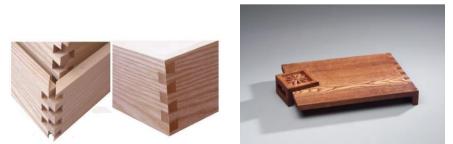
The structure of dovetails and the finished drawer design by using dovetails.
